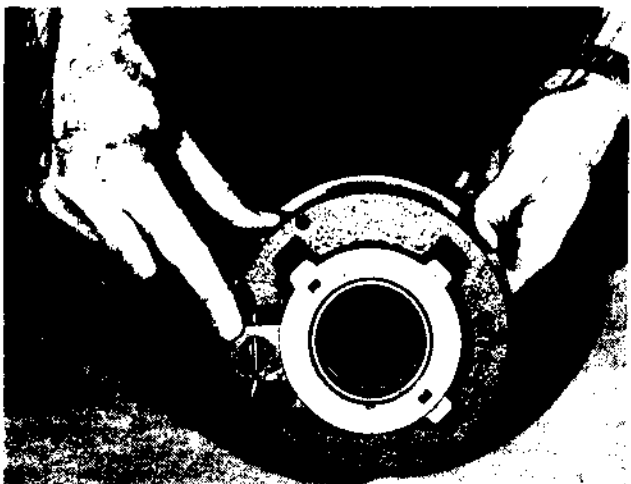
Oil Regulating Valve Installed in Design Sequence C.
